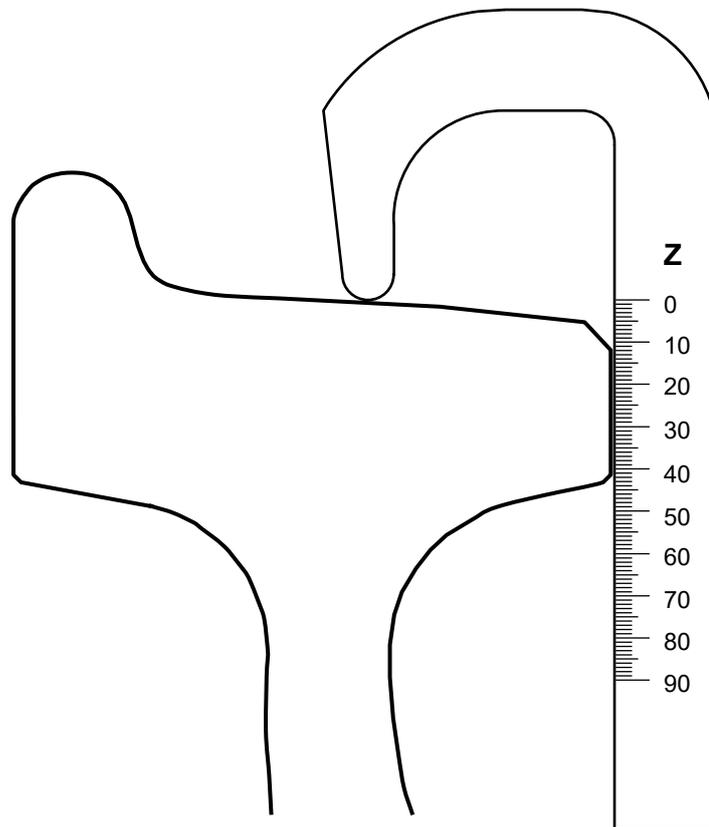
Wheel Tread Thickness – Legacy Dimension ‘Z’
